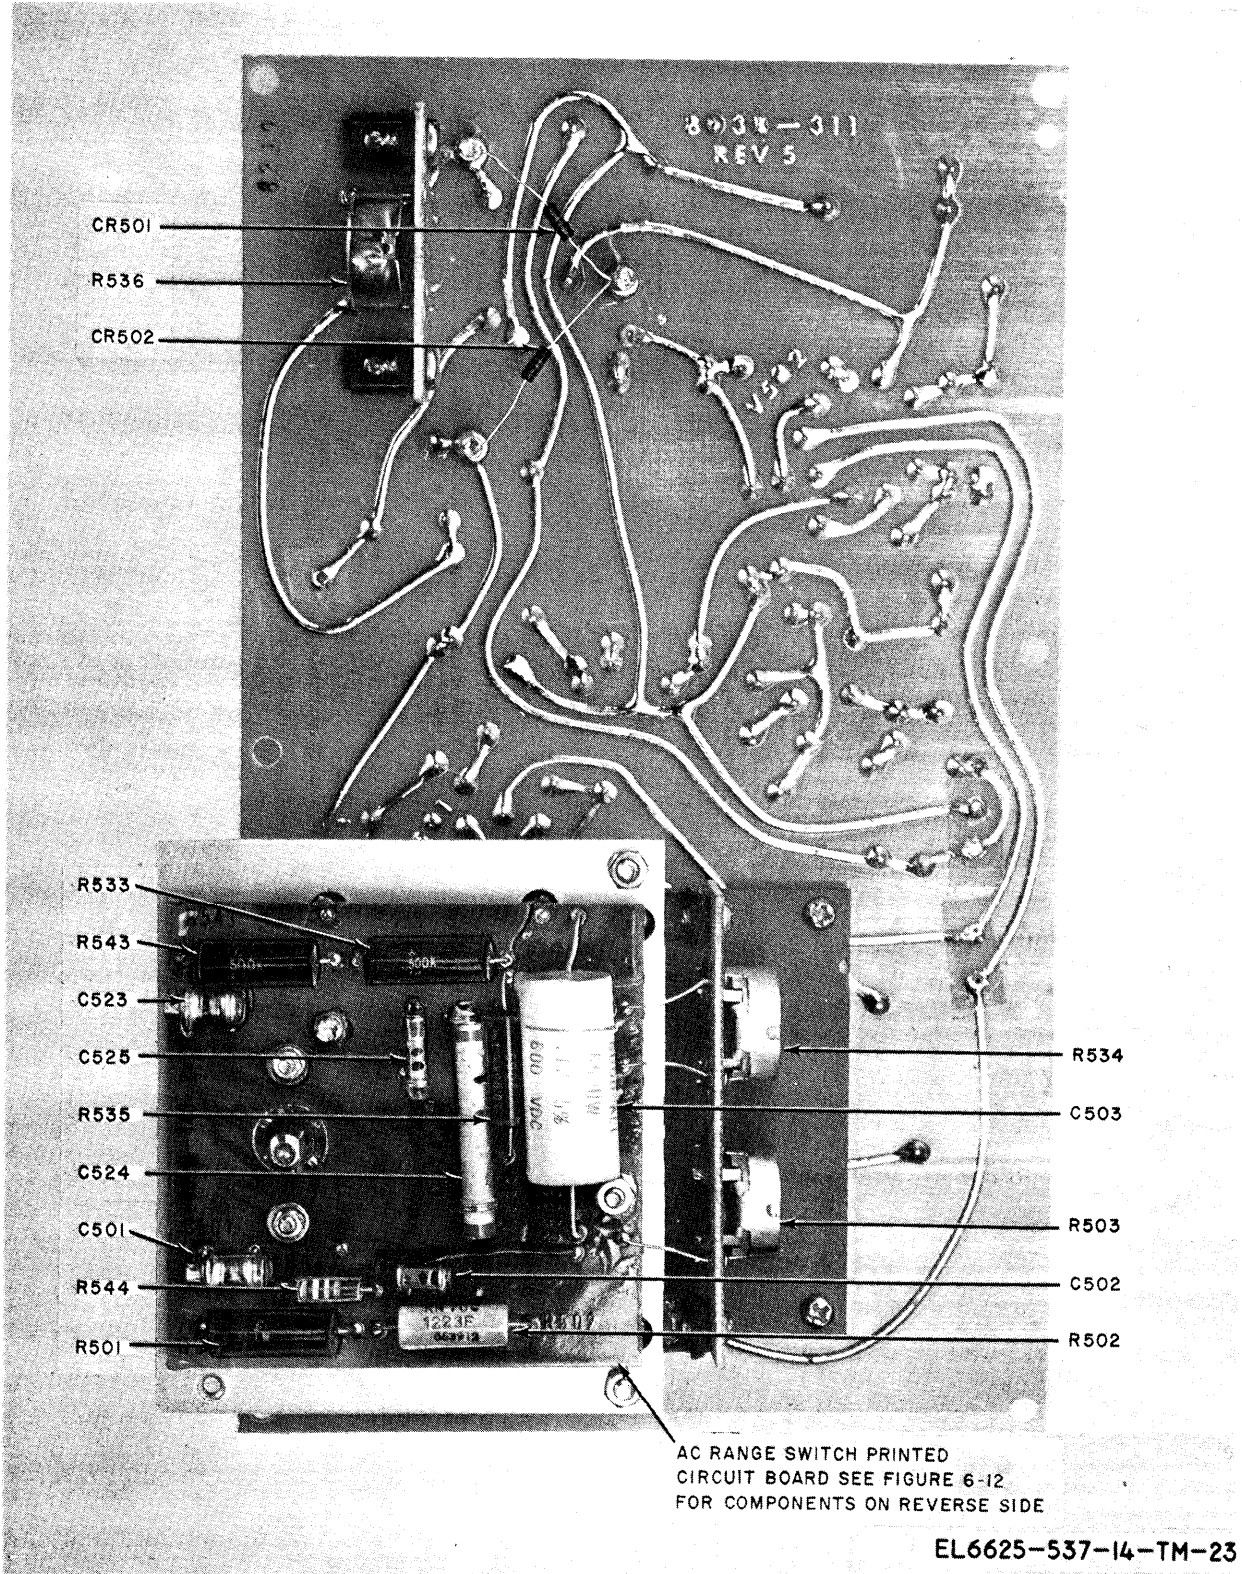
Ac-to-dc converter and ac range assembly, rear view, showing component location.
